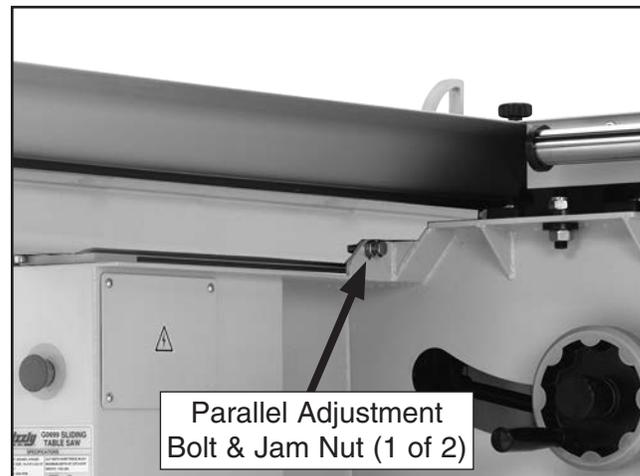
Sliding table parallel adjustment bolt (1 of 2).
